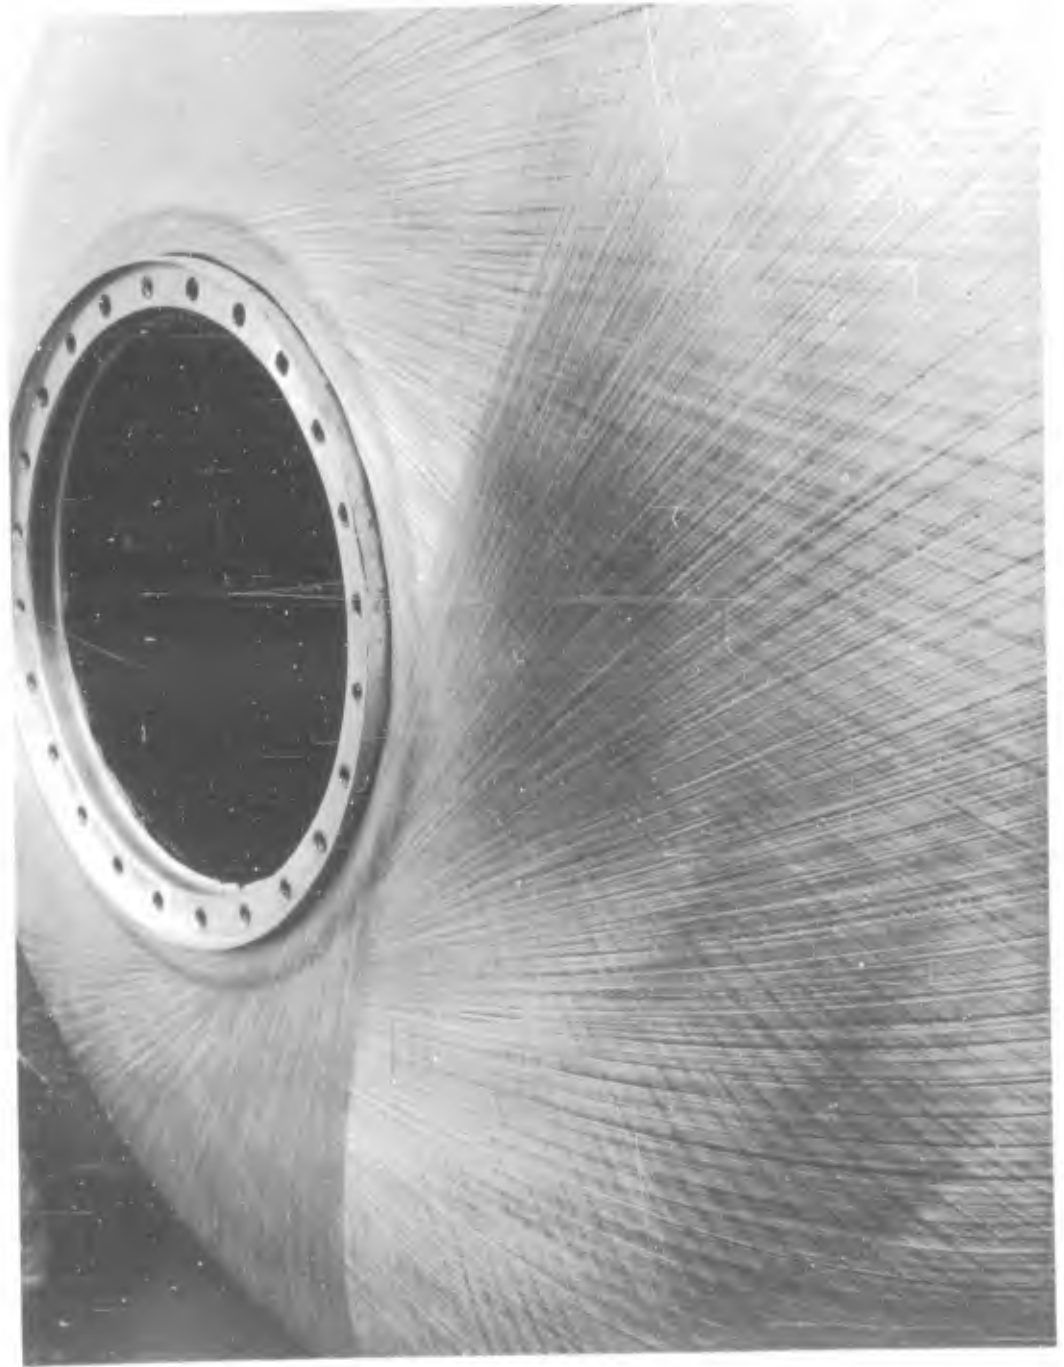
Serial No. 3, 44.3-Inch Chamber, Closeup View of Forward Boss
